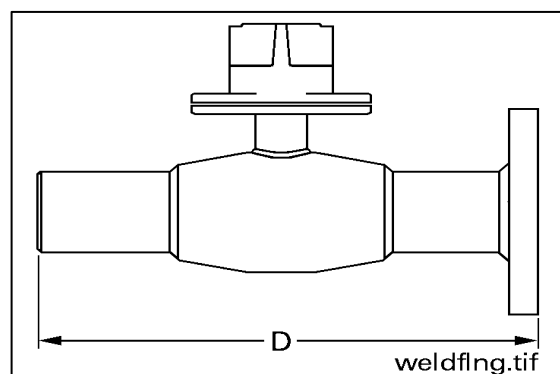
Full Port Ball Valve: Weld x Flanged End
